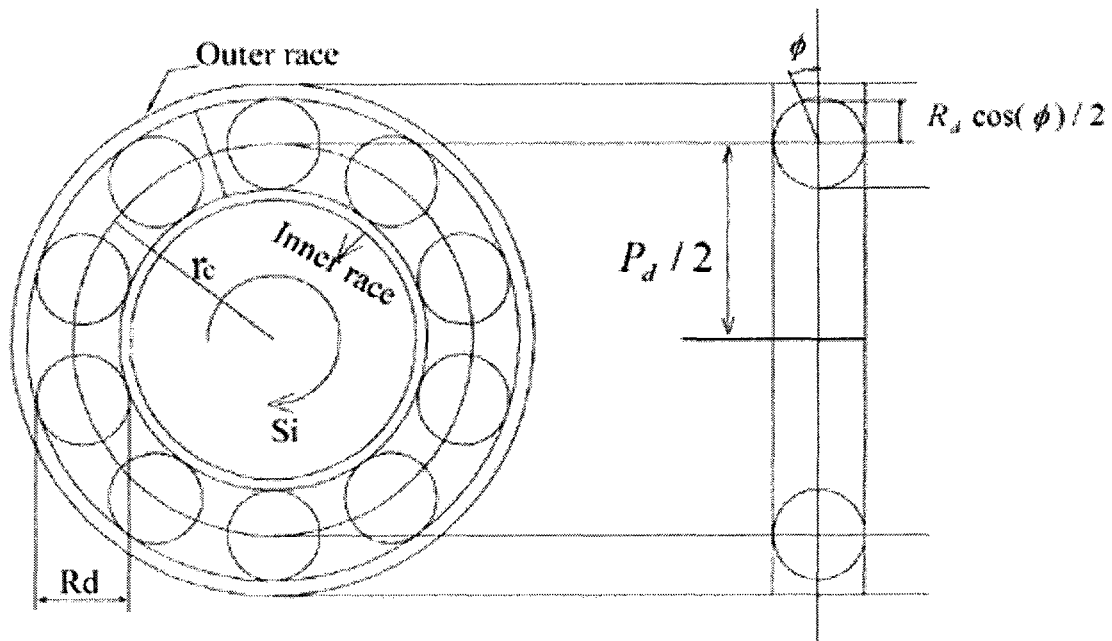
(a) Axial view of a generic bearing. (b) Cross-sectional view of a generic bearing (Taylor and Kirkland 2004).
